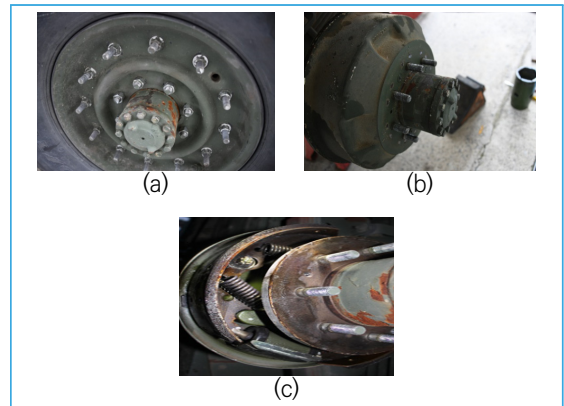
The normal condition of tire hub with drum and wheel, (a):normal wheel assembly, (b):wheel removed from (a), (c):hub removed from (b)
